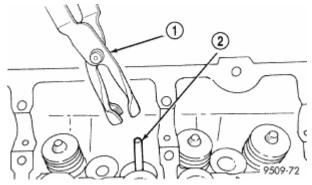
Removing Valve Stem Seal Courtesy of CHRYSLER LLC
